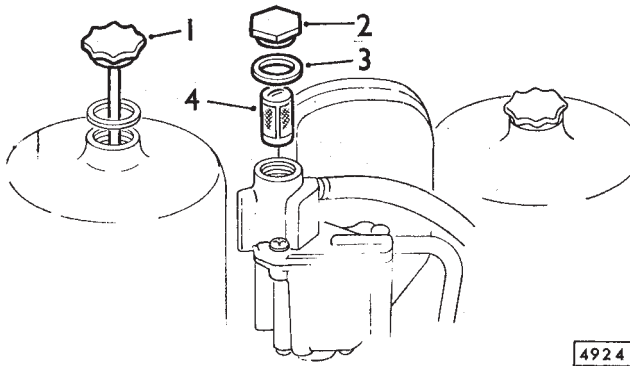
Showing carburettor piston dampers and automatic enrichment device filter.
